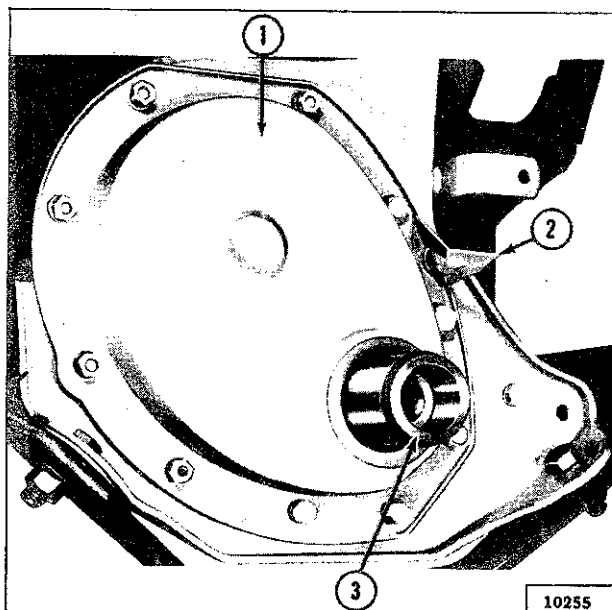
INSTALLING TIMING CHAIN COVER AND POINTER
